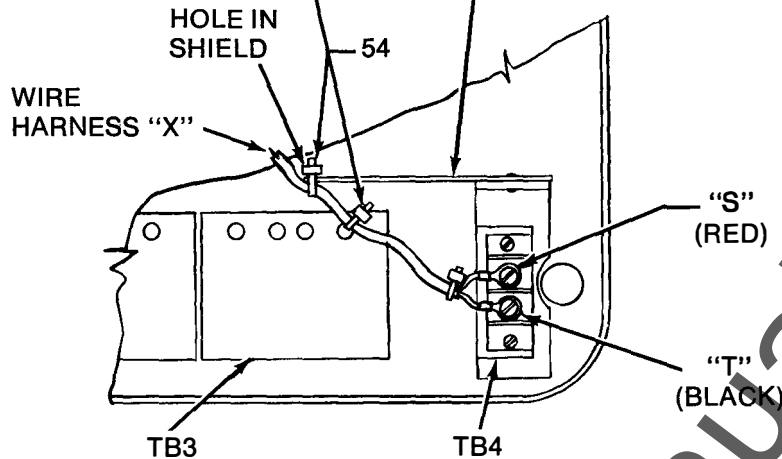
Connection of Harness "X" from flux shift trip device to terminal board TB4 on back frame.
